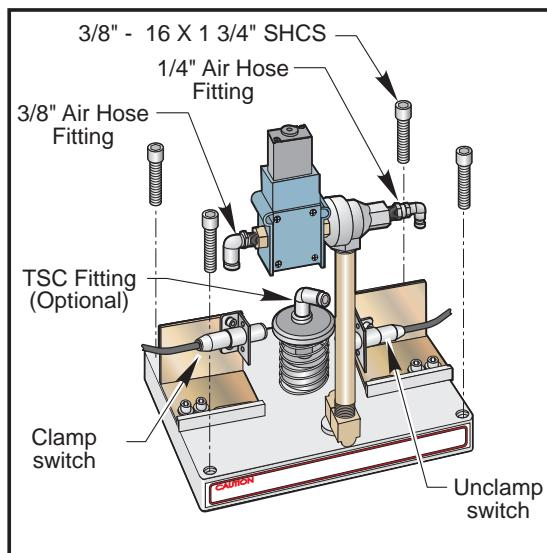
Tool Release Piston with Optional TSC fitting.
